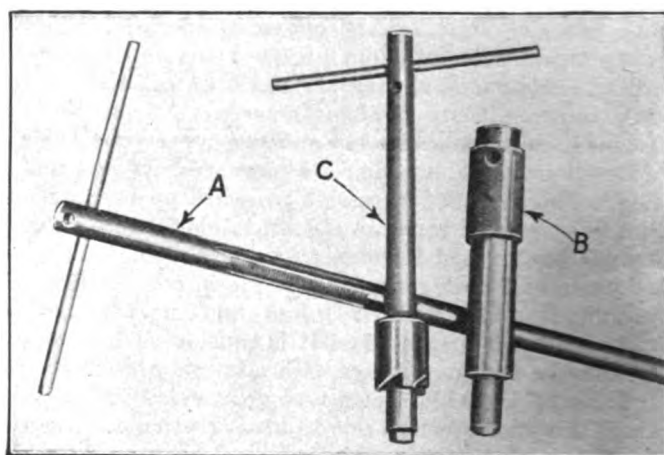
A SIMPLE CONNECTING-ROD REAMING FIXTURE. FIG. 3. TOOLS FOR REMOVING, REPLACING AND FACING FORD DRIVE SHAFT BUSHINGS
